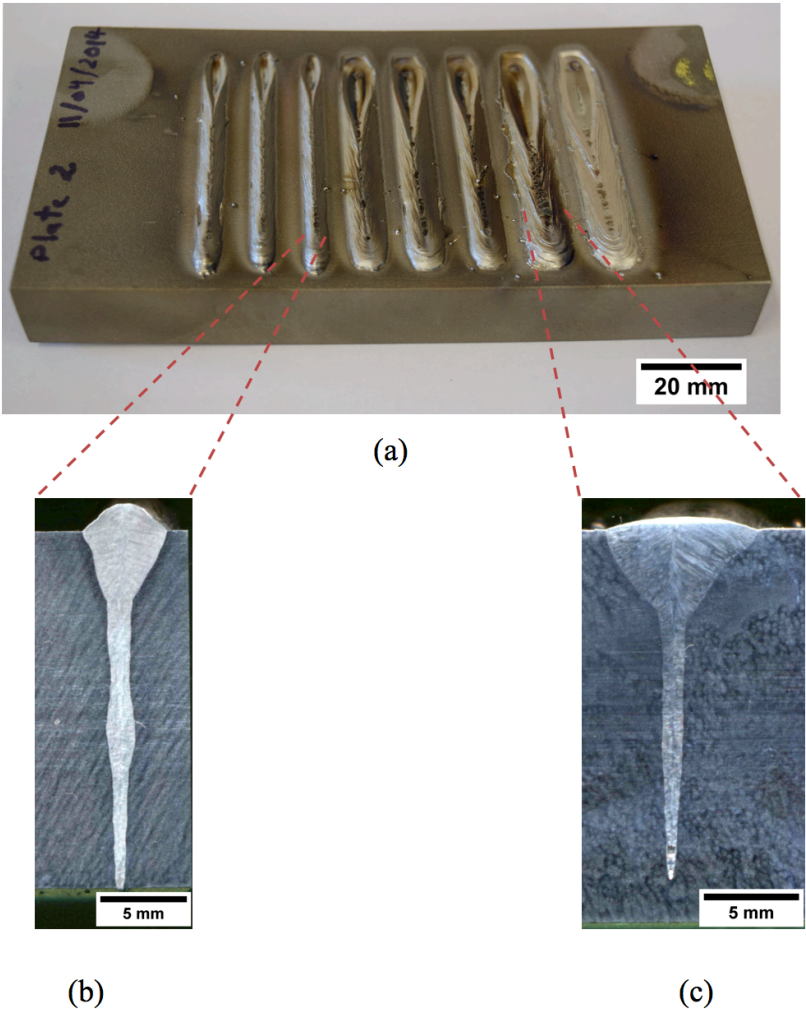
The effect of the beam current and welding speed on the weld penetration and profile. (a) Weld beads in plate 2 (b) Cross section of weld Bead 3 with 100mA, 9 mm/s (c) Cross section of weld Bead 7 with 142 mA, 13mm/s.
